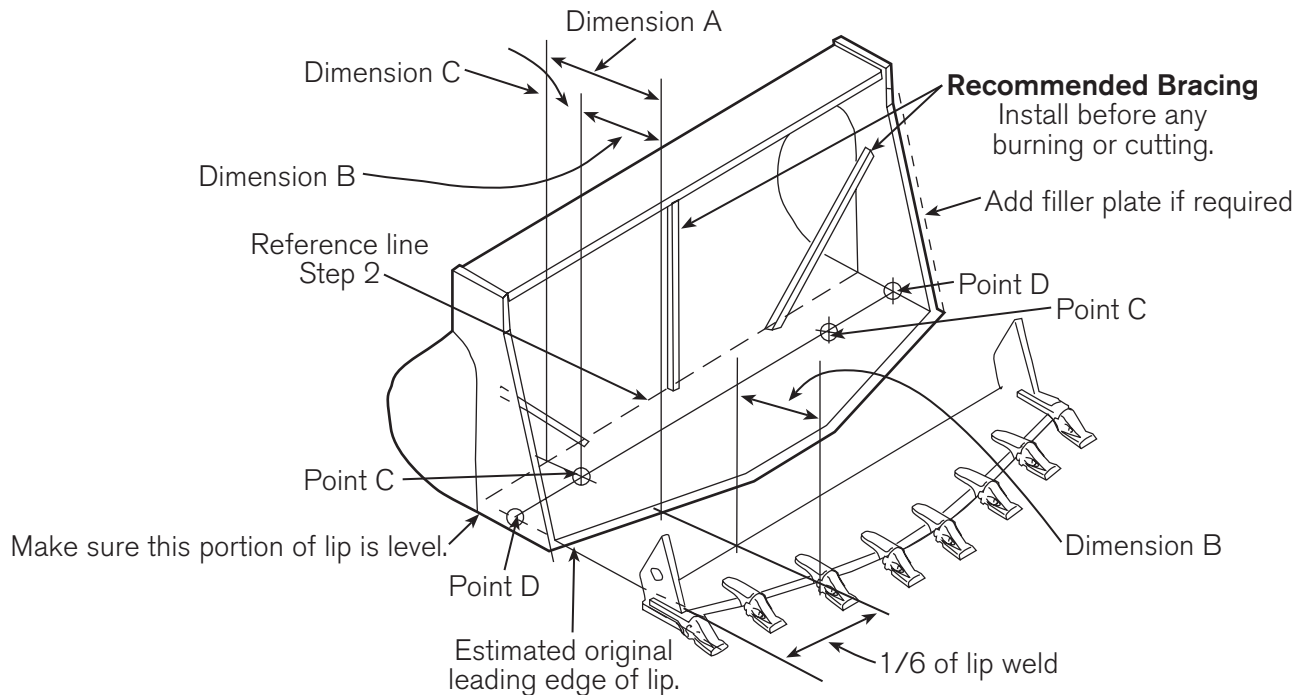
Locating Loadmaster Lip profile on bucket floor.
